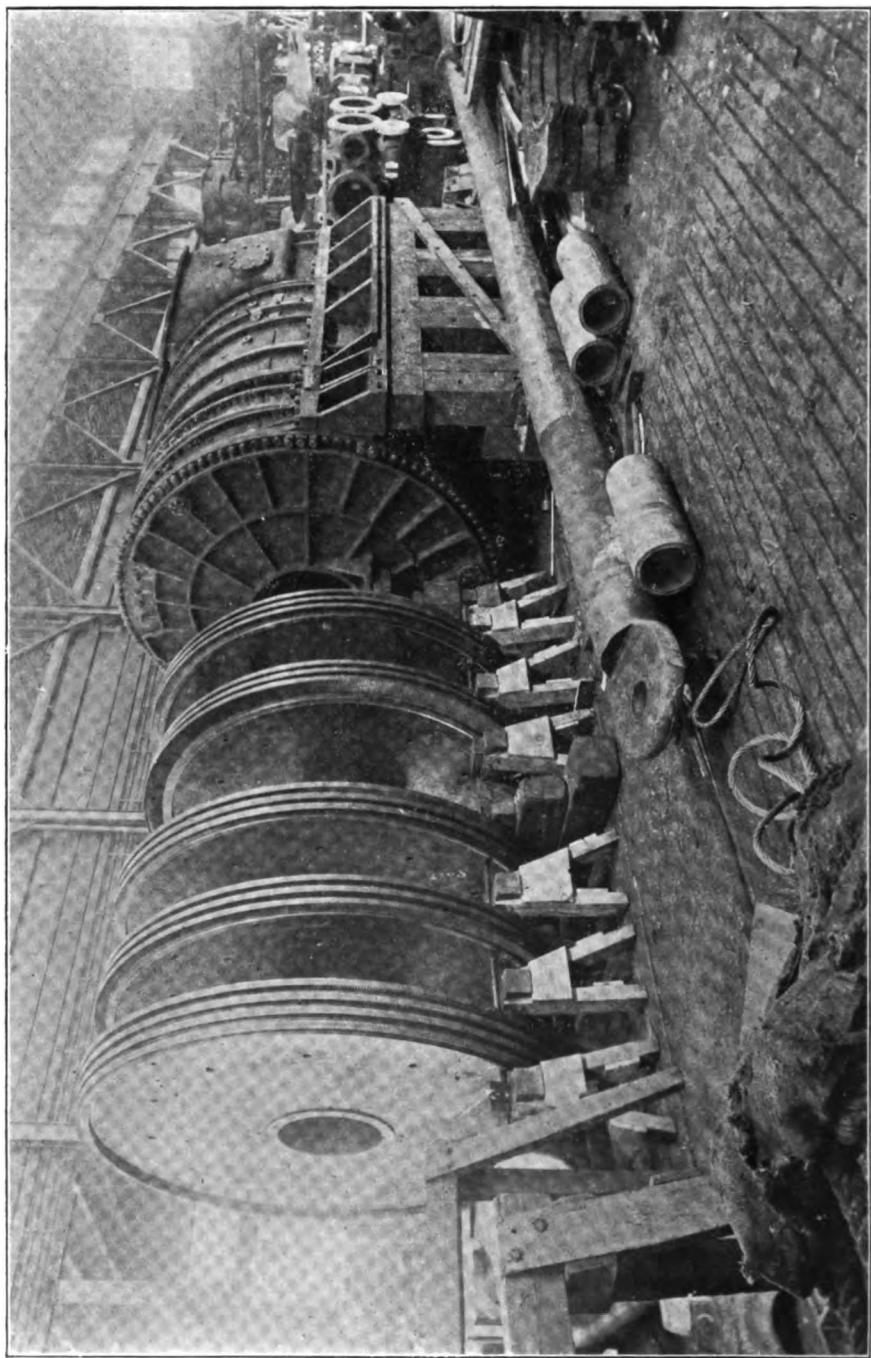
TURBINE CASING WITH WHEELS READY TO ASSEMBLE.
